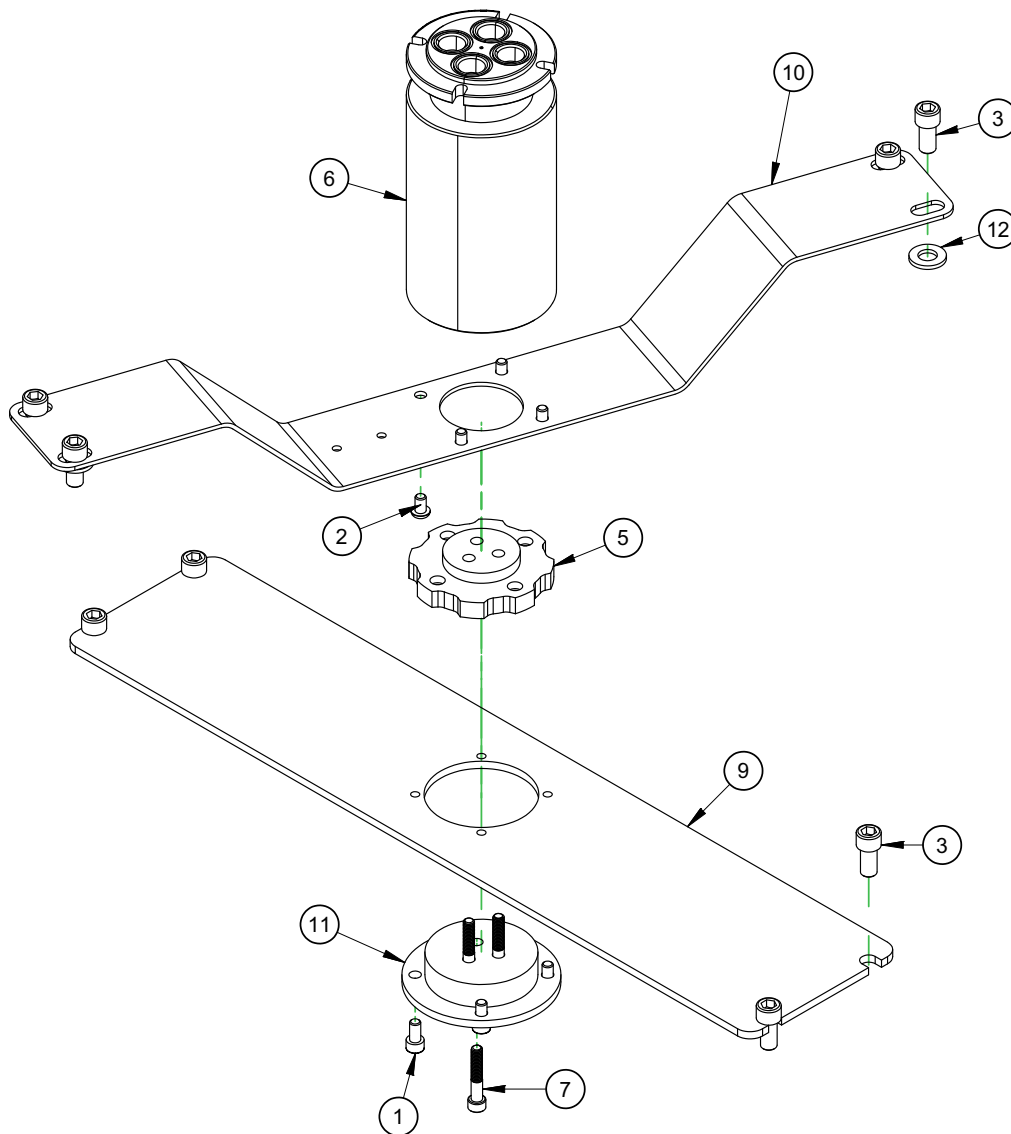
SINGLE POINT ASSEMBLY (P/N 62037)
